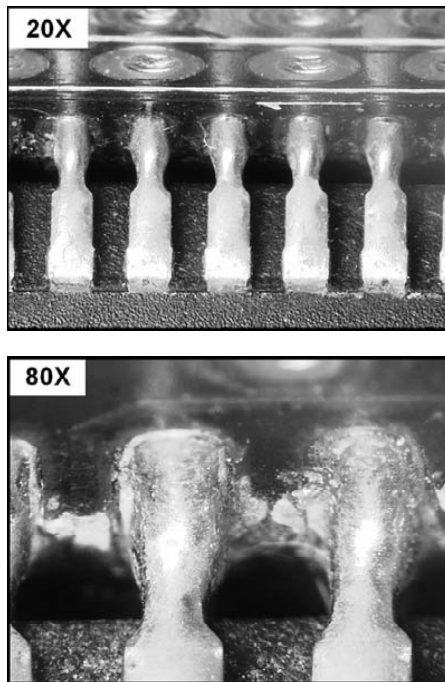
Stereo microscope images showing crack-free solder joints
